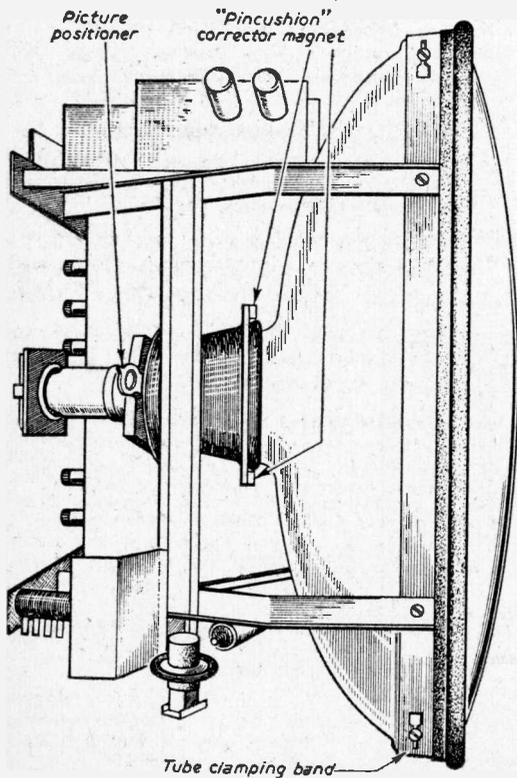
Sketch showing the layout and chassis assembly of the Regentone Ten 17.
